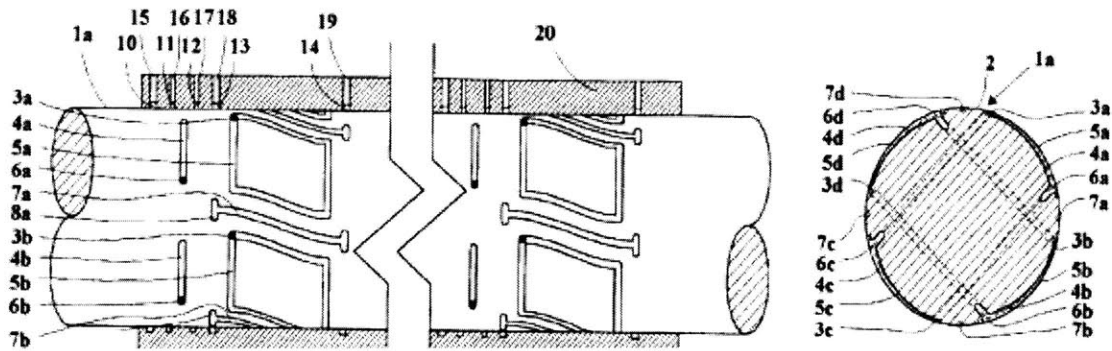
Surface self-compensating bearing with cross drilled collectors and load pockets on shaft
